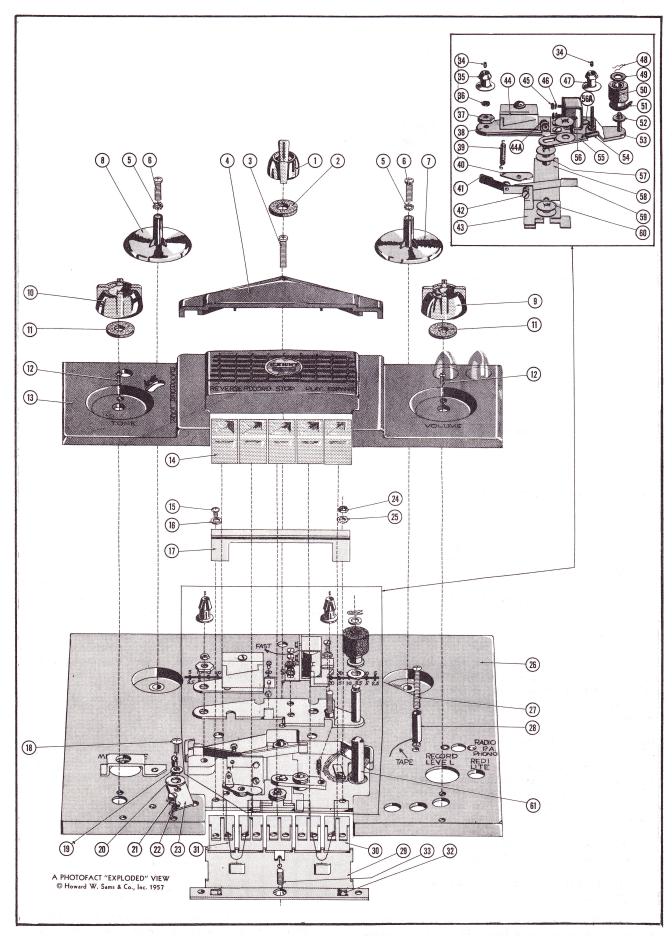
A - EXPLODED VIEW OF PARTS ABOVE BASEPLATE.
